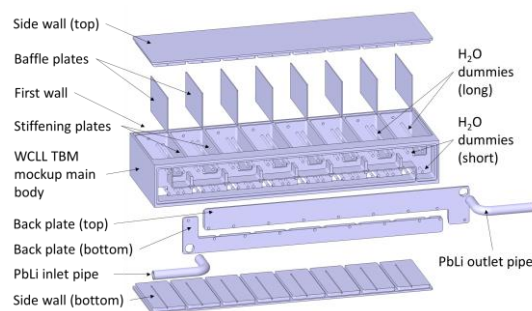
Exploded view of the WCLL MHD mockup with major components: main body, top and bottom walls, back plates as cover for the manifolds, and dummy parts that mimic the water pipes.
